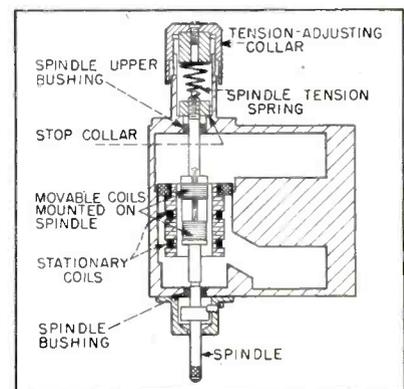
Electromechanical type gage has movable coils on spindle and two fixed coils
